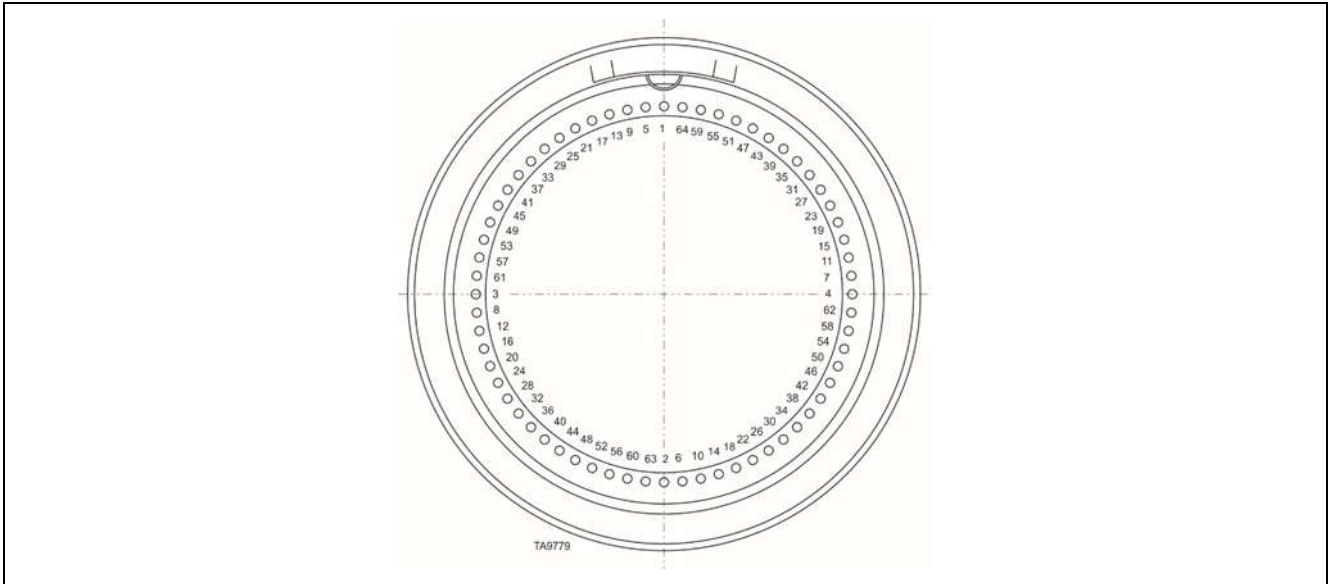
L-1350-L-1850-L-2350 wheel capscrew removal pattern – models 51, 51A2, 51A3, and 57 planetary drive
